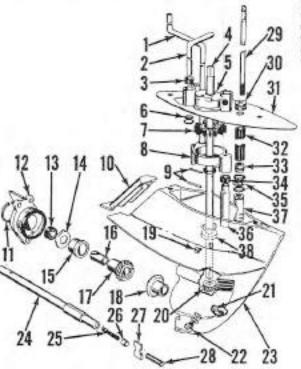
Exploded view of lower unit gearcase, water pumps and associated parts used on Fishing Scott except some 1963 models. Refer also to Fig. Mc68A.
